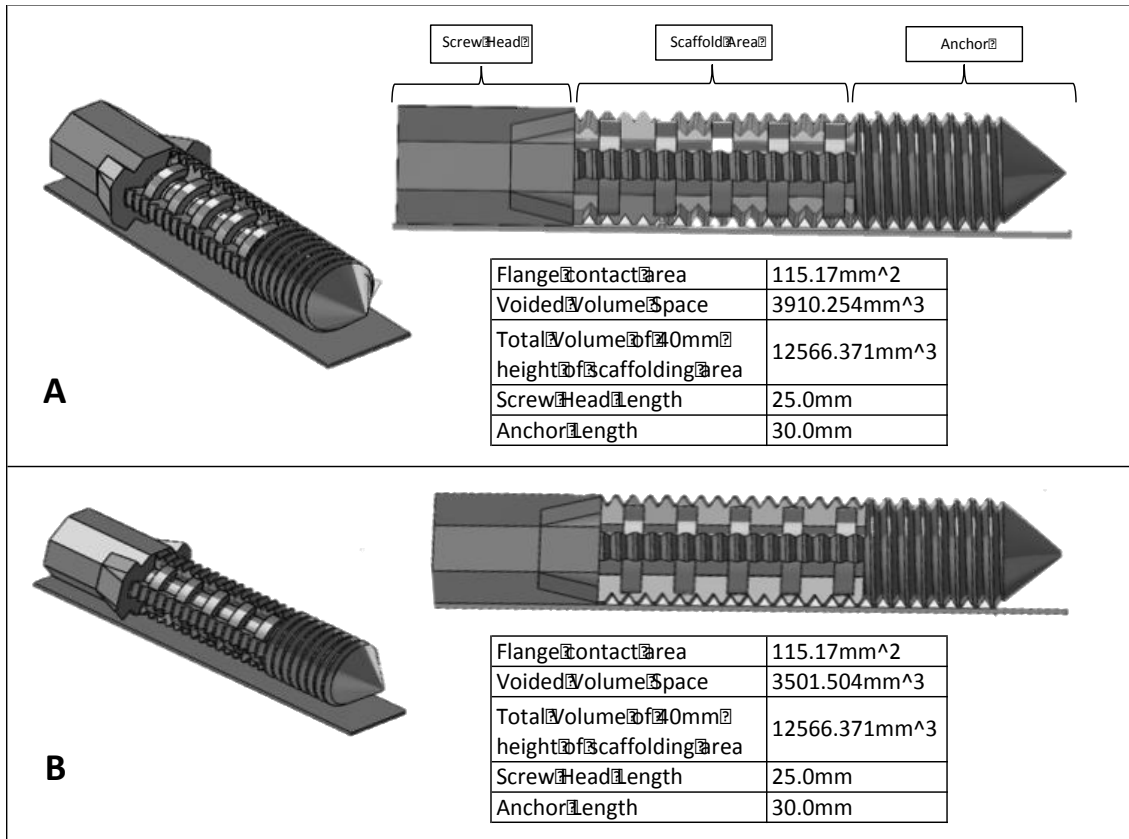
Three-fin (A) and Four-fin Fused Filament Fabrication 3D printed osseointegrated screw dimensioning.
